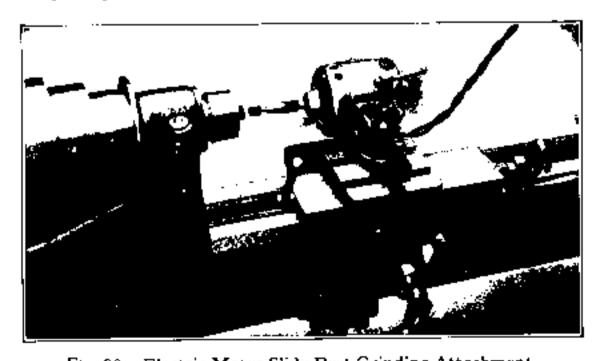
Electric Motor Slide Rest Grinding Attachment
